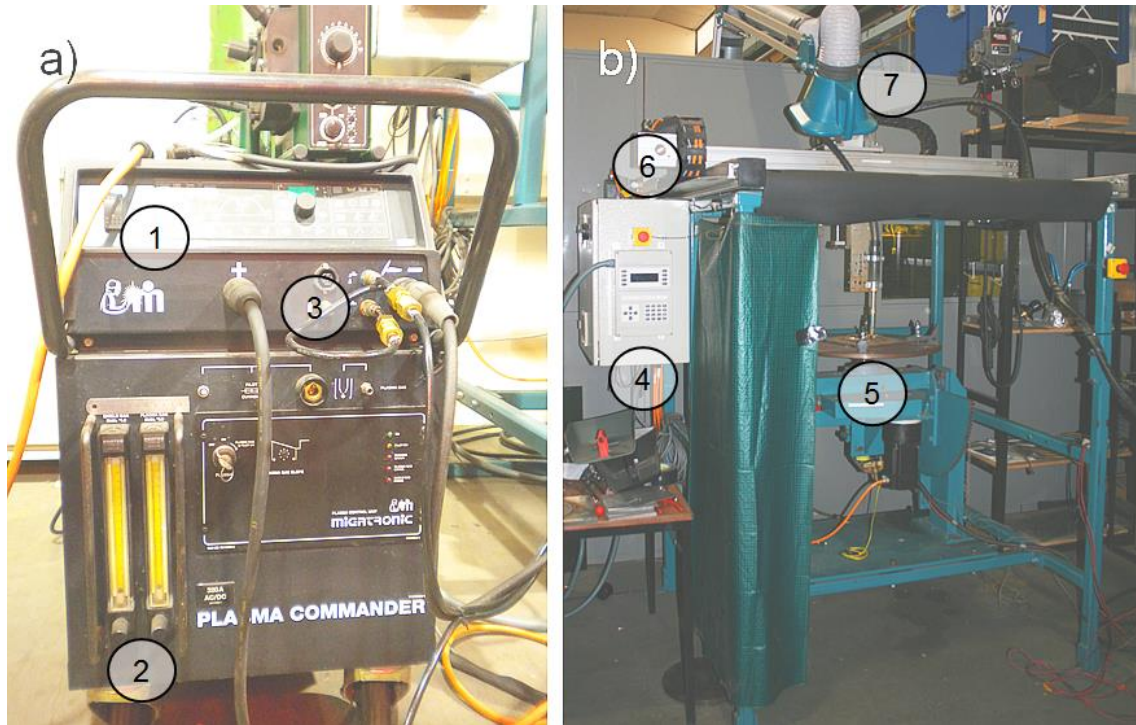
GTAW welding machine and 5-axis rig; a) migatronix TIG/plasma welder Commander 320 AC/DC, 1: control panel power source, 2: shielding gas flow meter, 3: power and cooling water connections; b) 5-axis rig, 4: Trio Motion control panel, 5: turntable with two rotating axes (one manual, one automated), 6: two horizontal axis (x,y) and one vertical axes (z), 7: fume extractor
